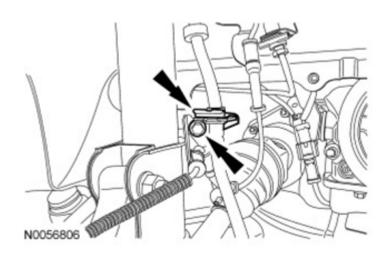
Locating Brake Hose Retainer And ABS Sensor Retaining Bolt Courtesy of FORD MOTOR CO.
